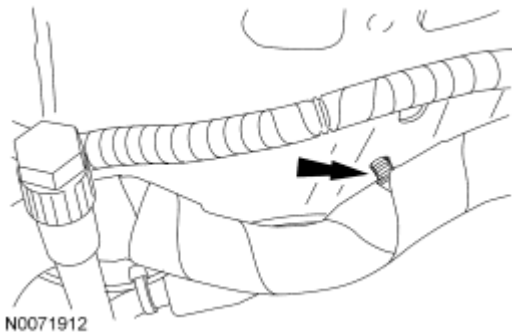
Locating Pin-Type Wiring Harness Retainer
